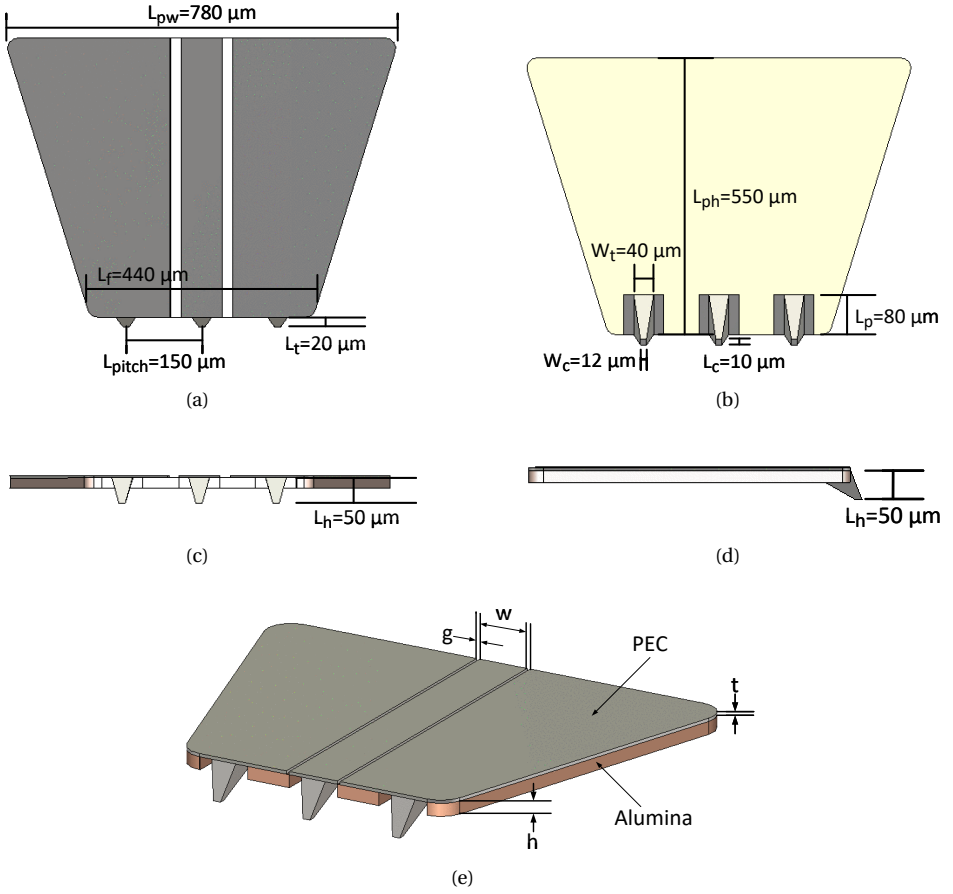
Simulation model of I50 Infinity coaxial probe designed in CST (a) top view, (b) bottom view, (c) front view, (d) side view, (e) perspective view
